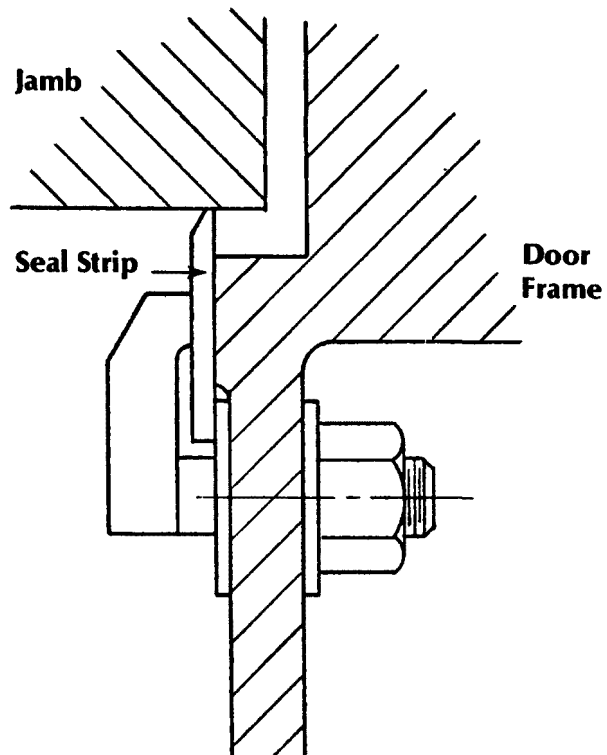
CROSS SECTION OF A TYPICAL "KNOCK-TYPE" SEAL
